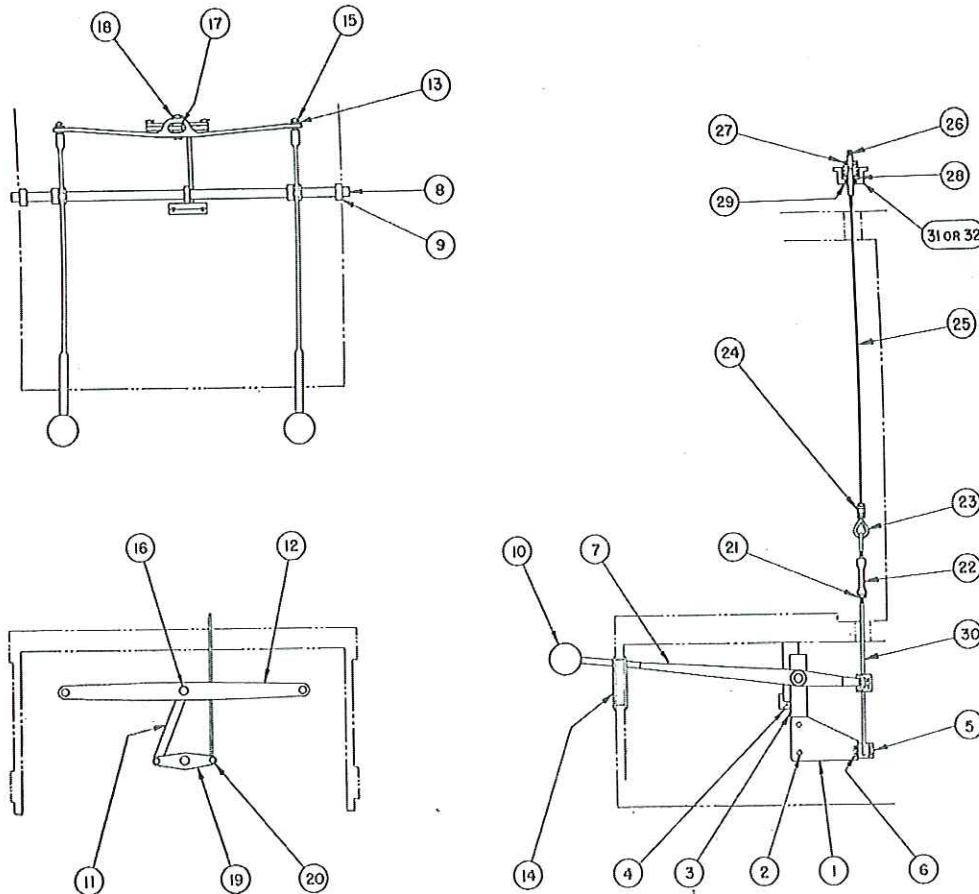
Model C31 Dual Handle Cable Control Assembly for all automatically controlled 8-ton Multipresses.
